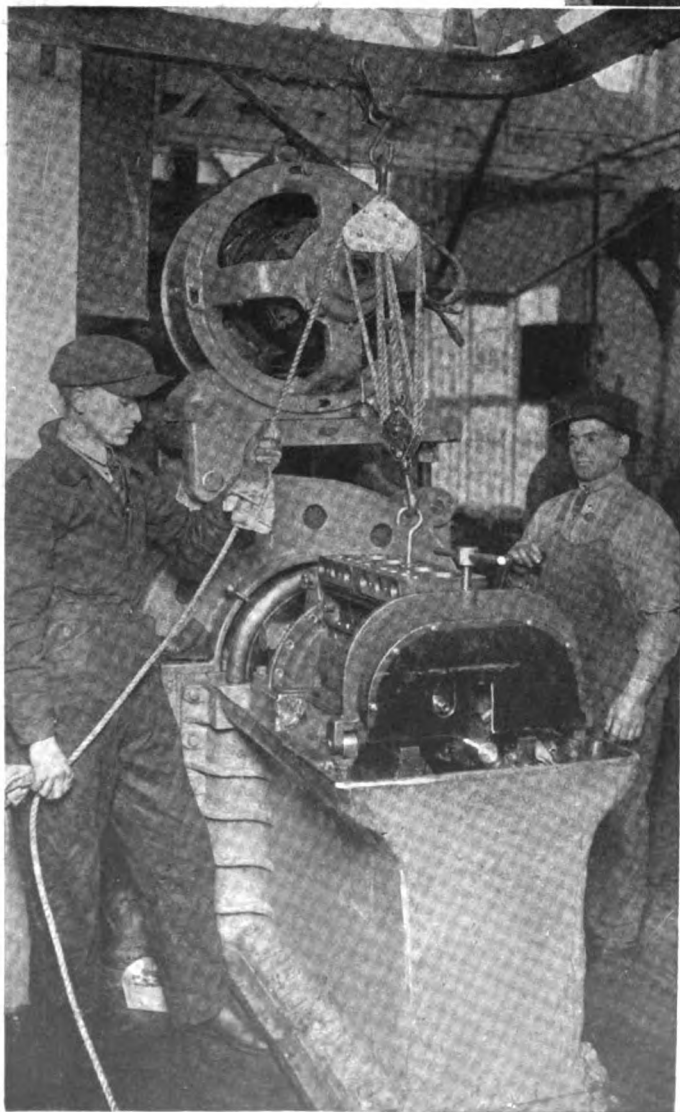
Cylinder block on the bearing burning-in machine, where the crankshaft bearings are burnished before being finally adjusted
